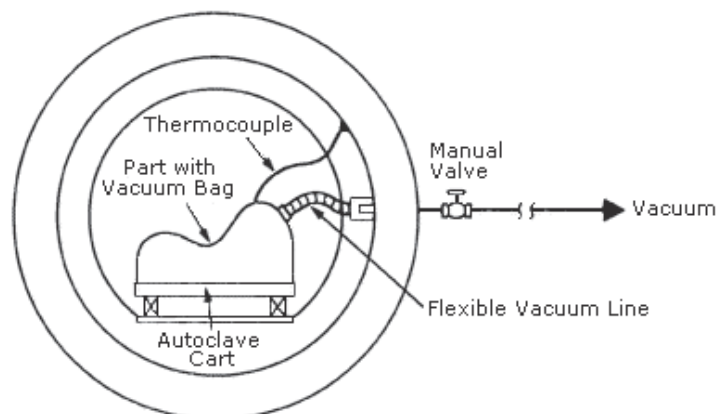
Autoclave moulding [Source: osha.gov]
